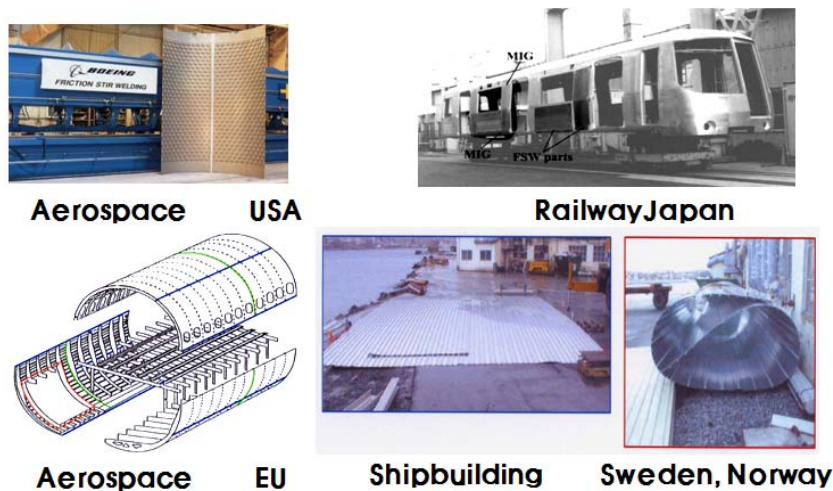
Application of Friction Stir Welding in industries
